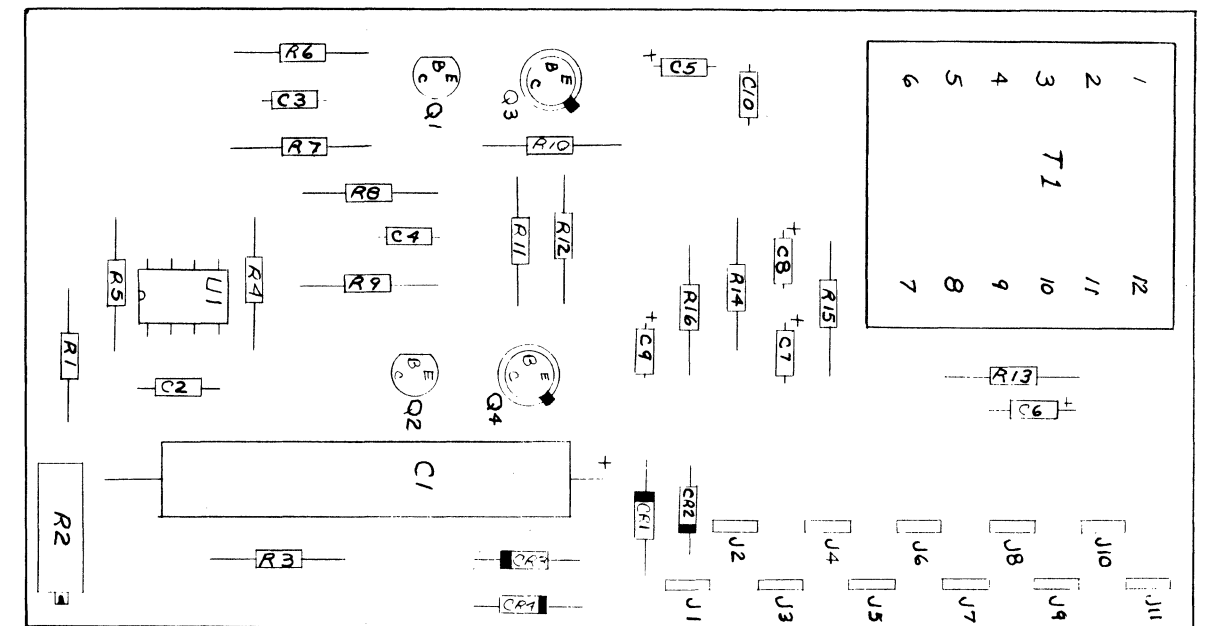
Oscillator Board (234 vac) Parts Location (837300)
